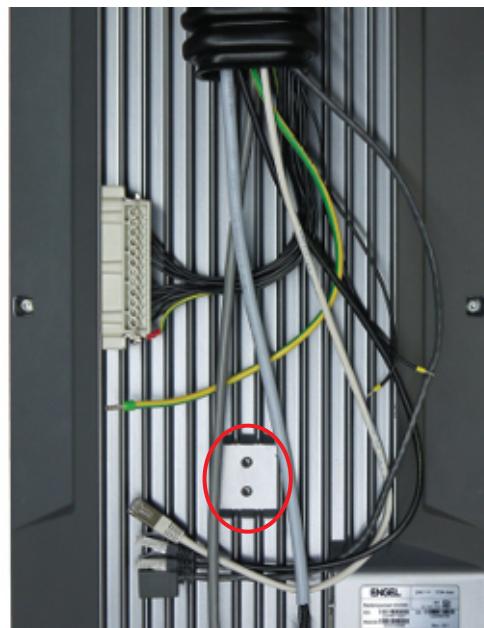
Threaded holes and contact surface for guide sleeve mounting
